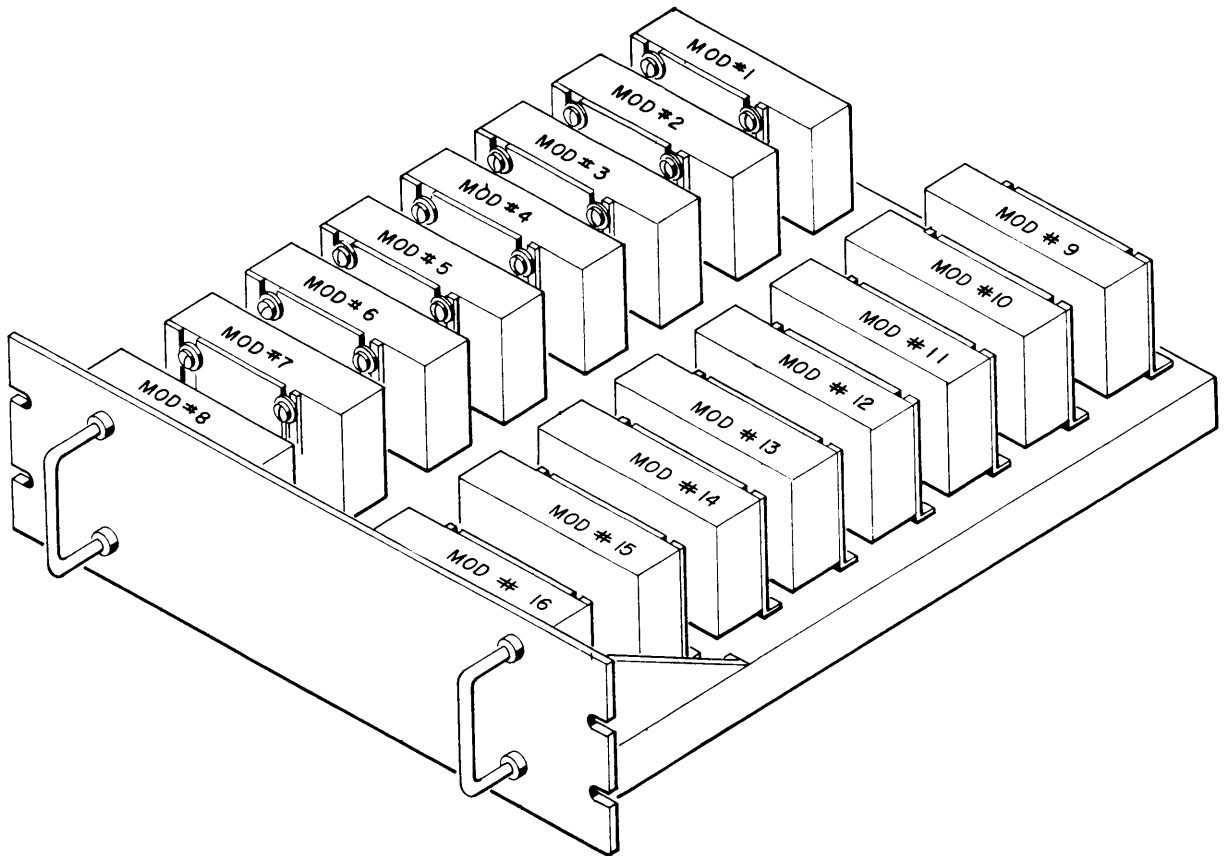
AN/FGC-60/22 Modulator Tone Converter Drawer, Isometric View
